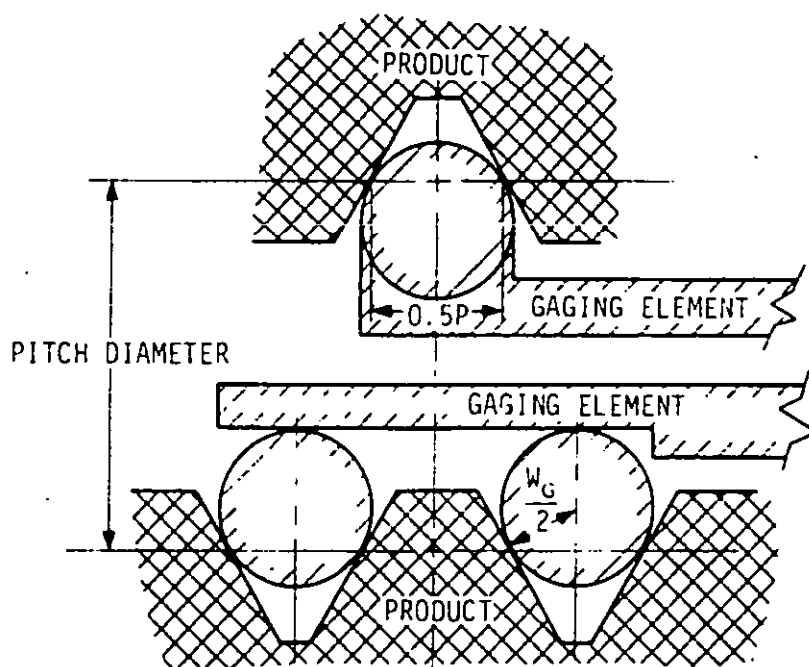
B.8 Gaging element for product internal pitch diameter measurement using "best size" balls
